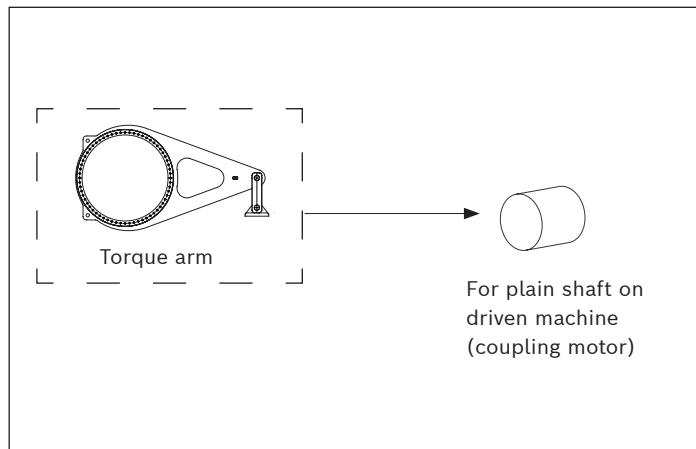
Single ended torque arm mounting for plain shaft (Coupling adapter is needed for spline motors)
